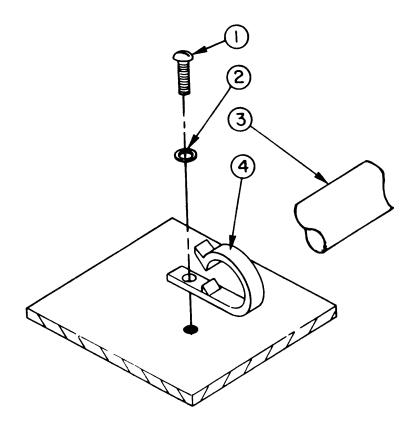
ROWPU Frame, Wire Harness/Cable, Clamp
